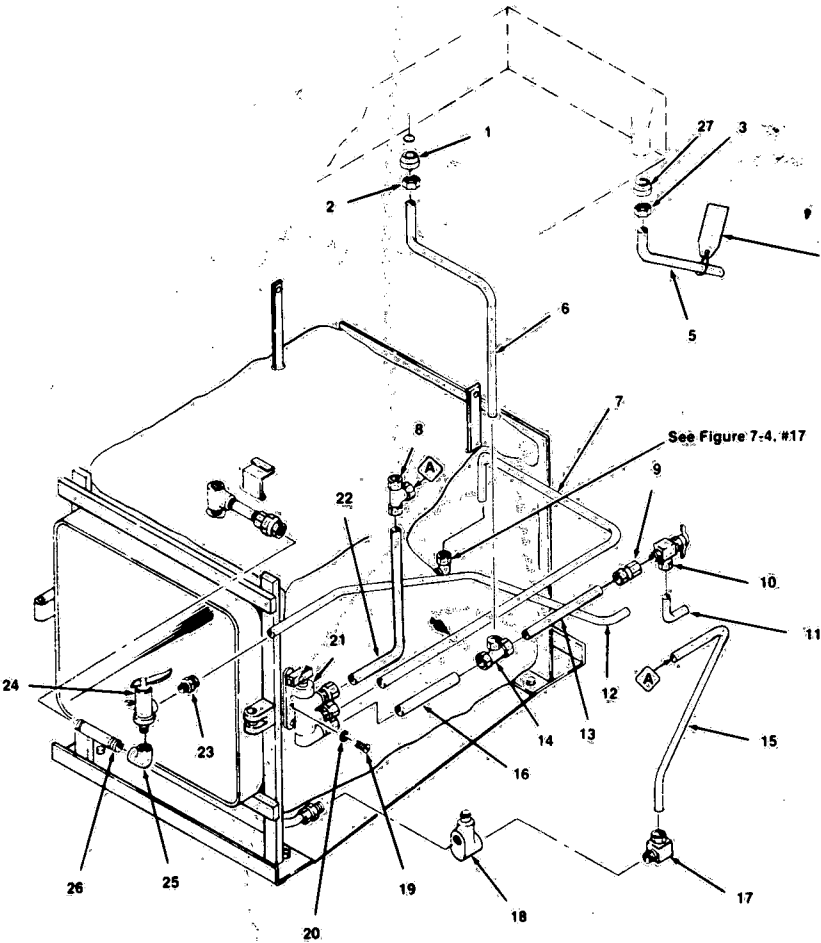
GENERAL ASSEMBLY — PART 3 OF 4.
